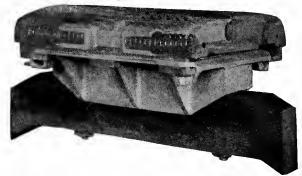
Creco Covered Roller Side Bearing Applied to Bearing Bridge of Six-Wheel Truck.
